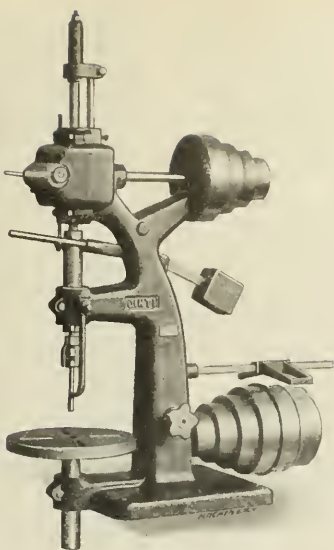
"Cinti" Automatic Tapping and Drilling Machine built by W. H. Simmons & Co.
